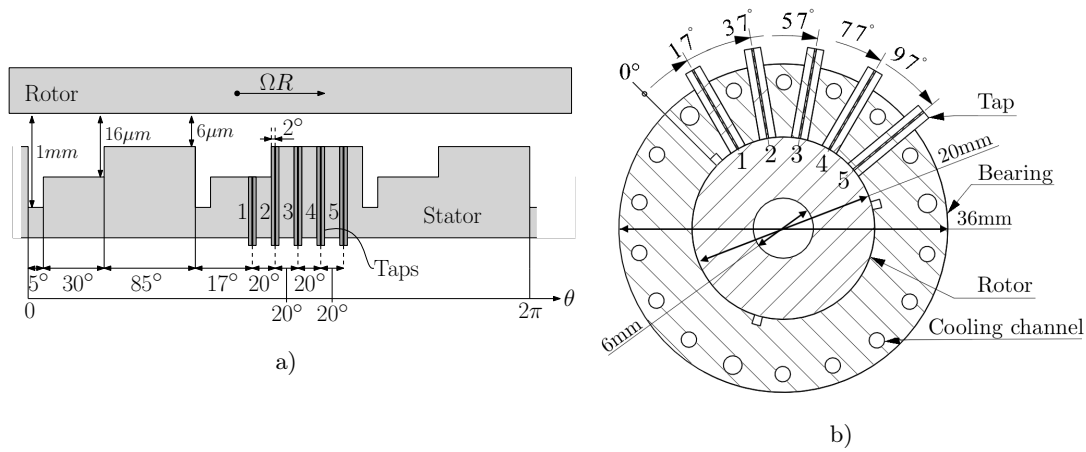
Geometry of the Rayleigh step journal bearing in the circumferential direction (a) and Cut of the motor-rotor-bearing system perpendicular to the rotor axis (b)
